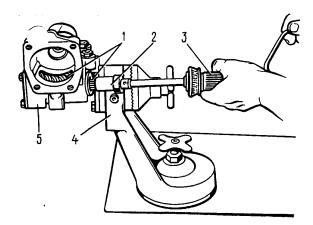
Worm Friction Torque Dynamometer Check: 1 - worm; 2 - head A.95697/5; 3 - dynamometer 02.7812.9501; 4 - repair stand bracket; 5 - steering gear case
